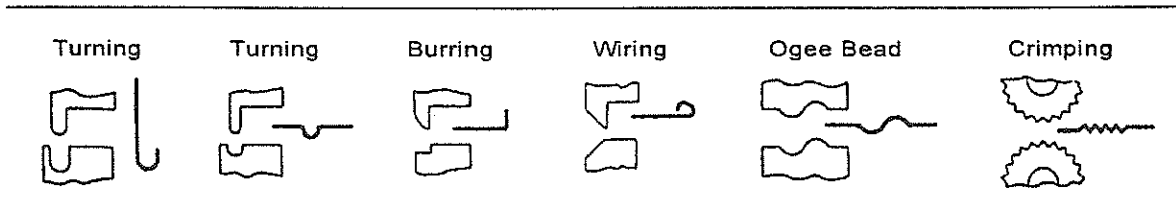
Profiles of Roll Dies included with Rotary Machine
